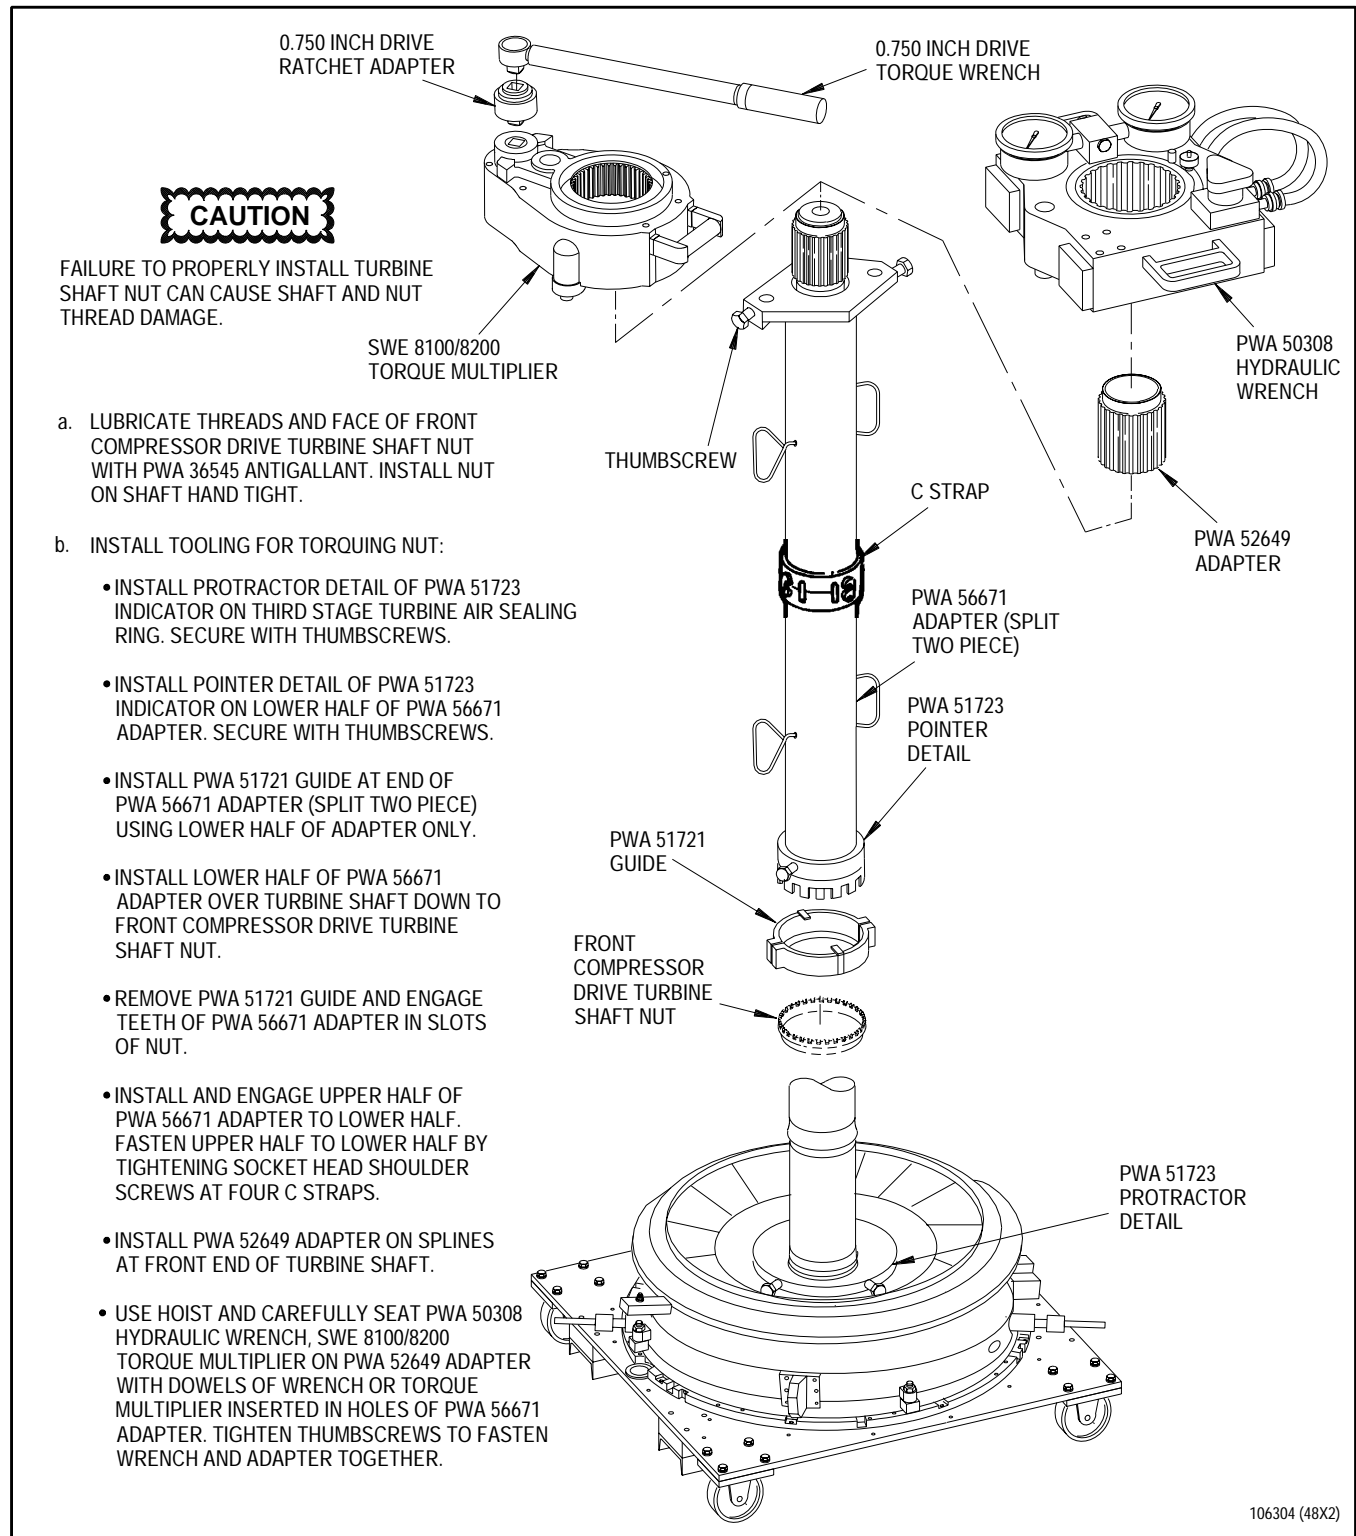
Front Compressor Drive Turbine Shaft Nut - Installation and Torque Procedure (Sheet 1 of 3)
